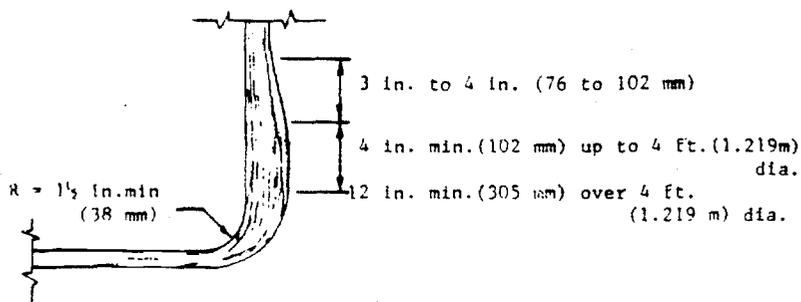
Bottom Knuckle of Flat-Bottom Tank
